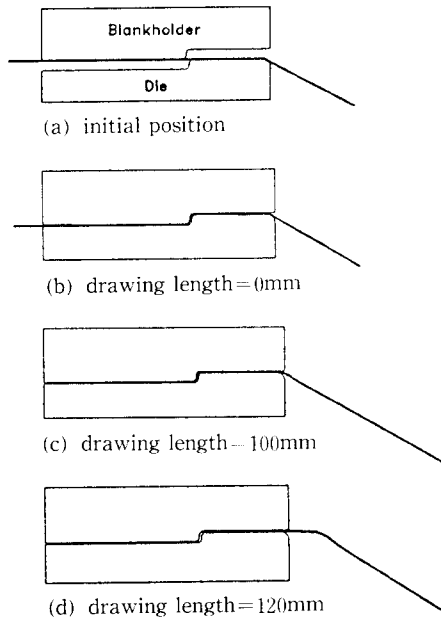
Drawn phenomena of specimen for each drawing length by drawing angle 30°
